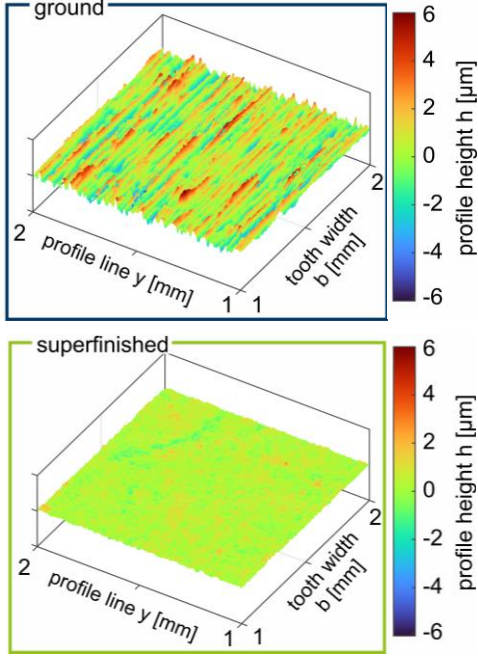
Surface topography of ground and superfinished gear flanks from the test gears
